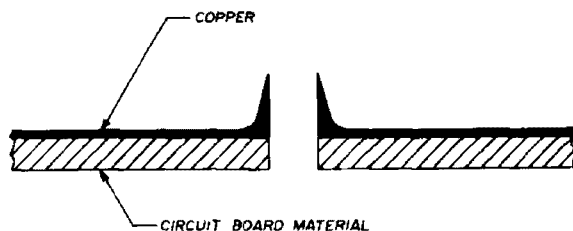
When drilling printed-circuit boards, a dull bit will produce an excessive burr as shown here.
